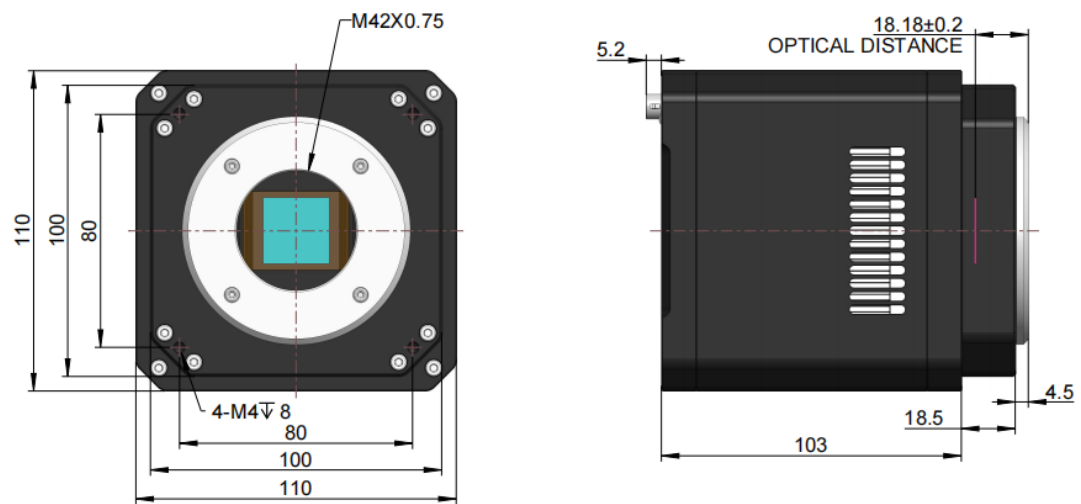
MaxCam-400UV-TE dimensions (mm)
